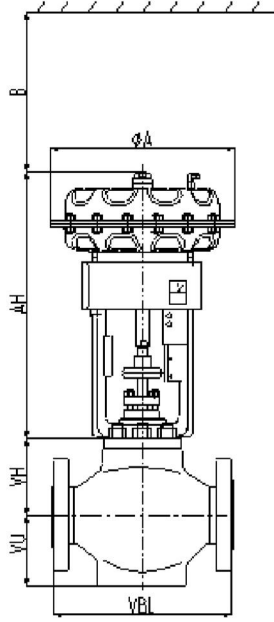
Overall drawing with top mounted handwheel for DN80-DN400(3"-16")
